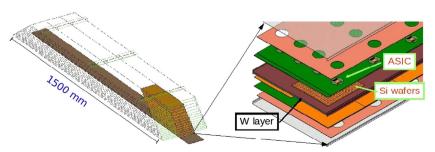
Left: sketch of the layers inside the mechanical structure of the technological prototype. Right: exploded image of one layer.
